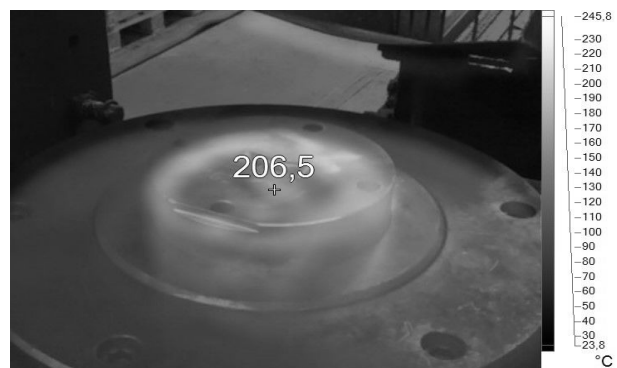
View of the multi-cavity for the slide blocks in the lower die for automatic forging process
